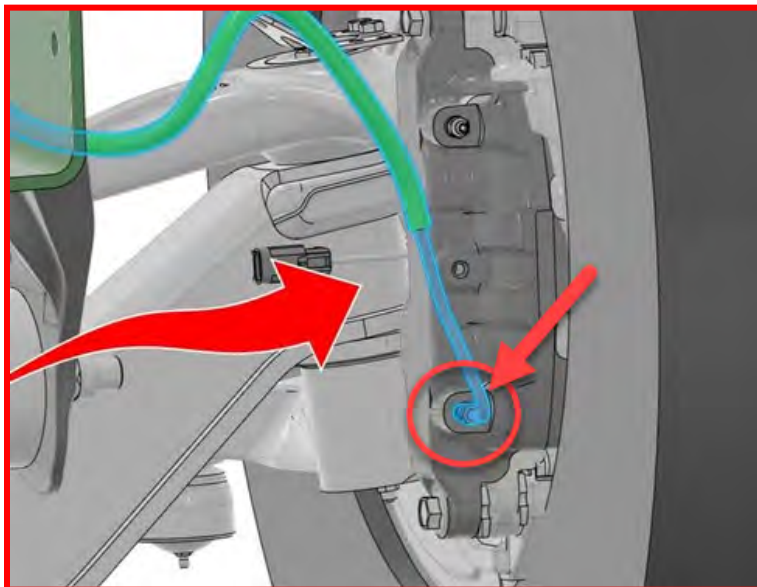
Rubber Brake Hose-to-Caliper Fitting
